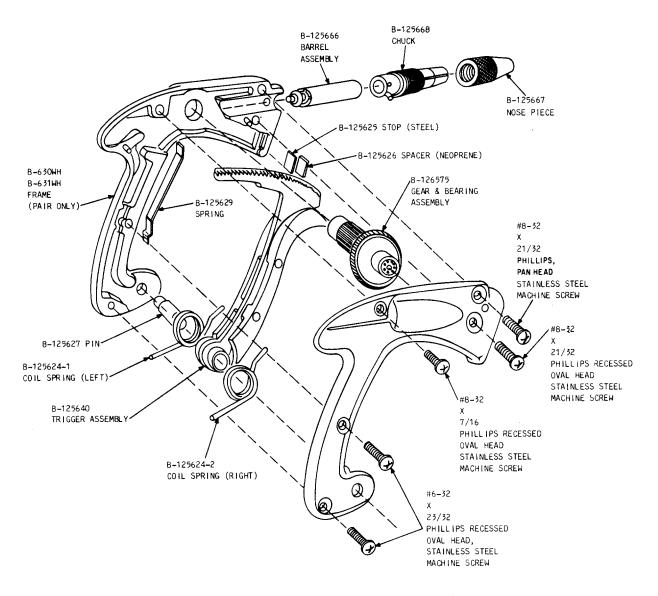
KS-16363 Wire-Wrapping Tool—Exploded View
